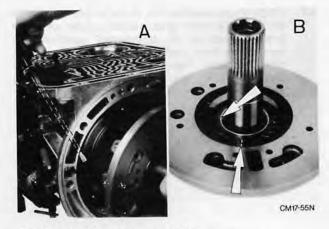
A – Removing pump body B – Relative positioning of pump gear wheels
